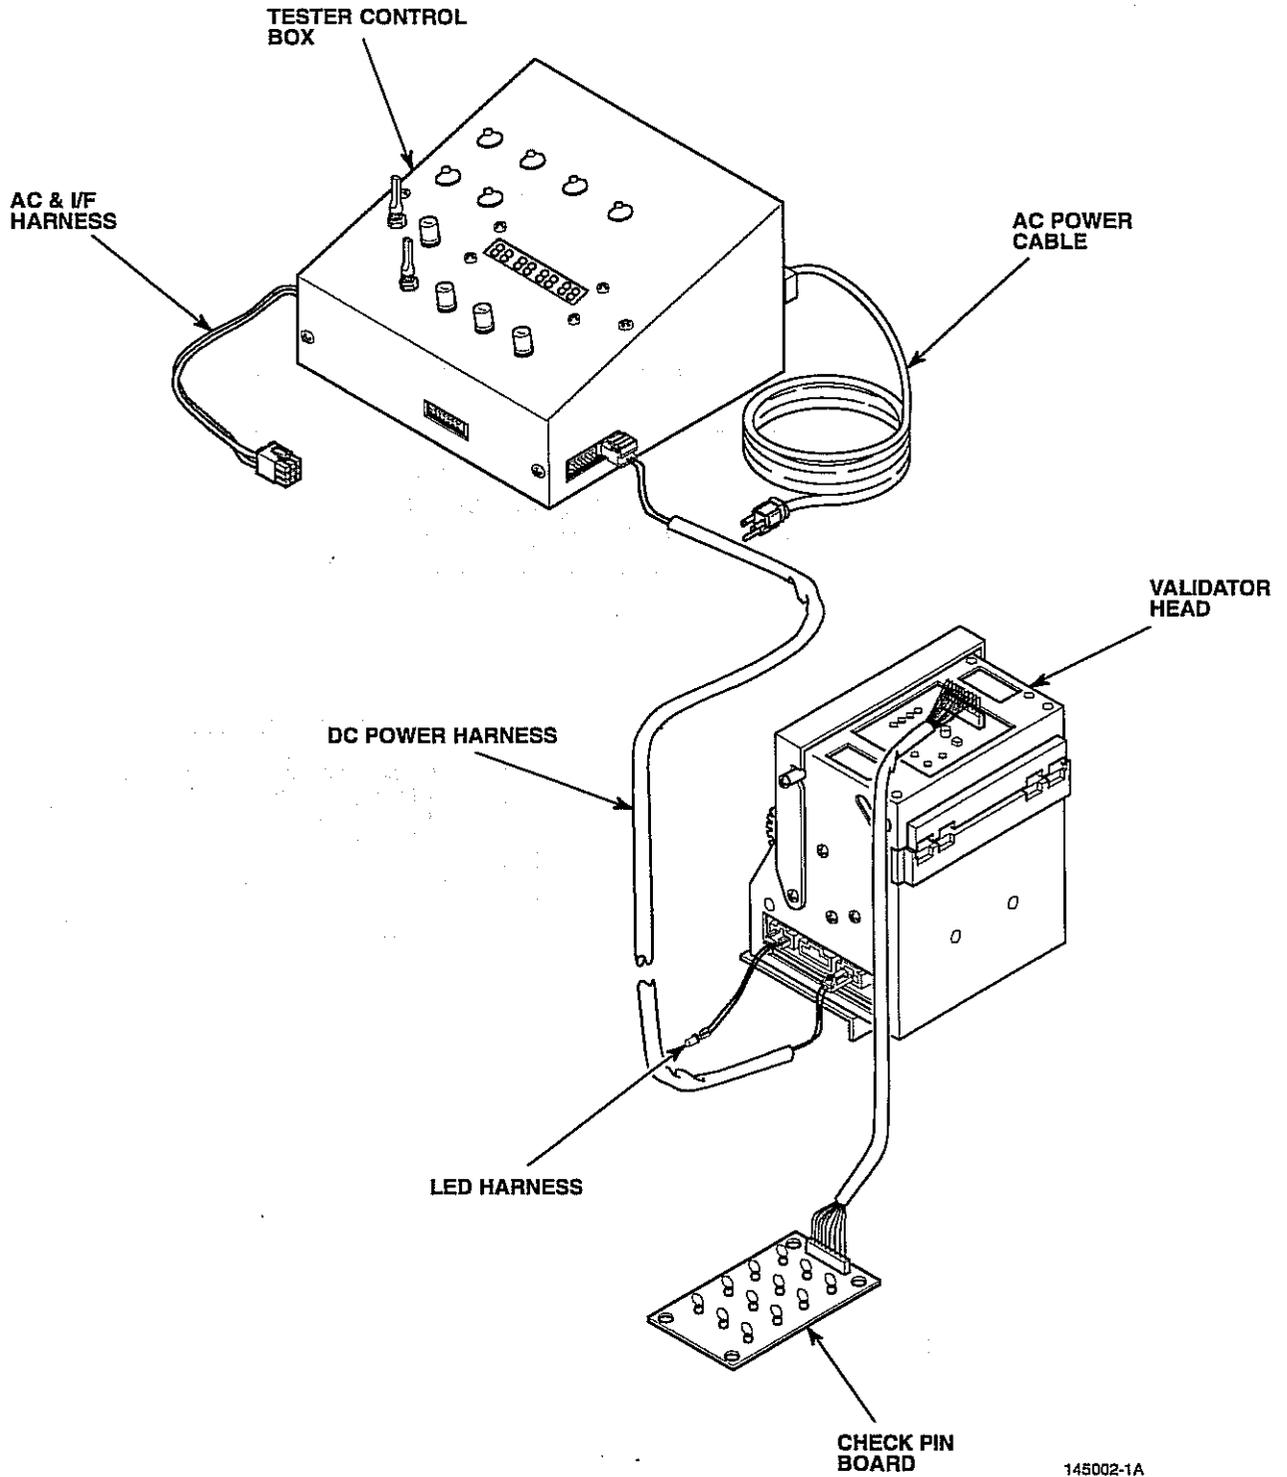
Connecting the VM-401 Tester Control Box – DBV-147.
